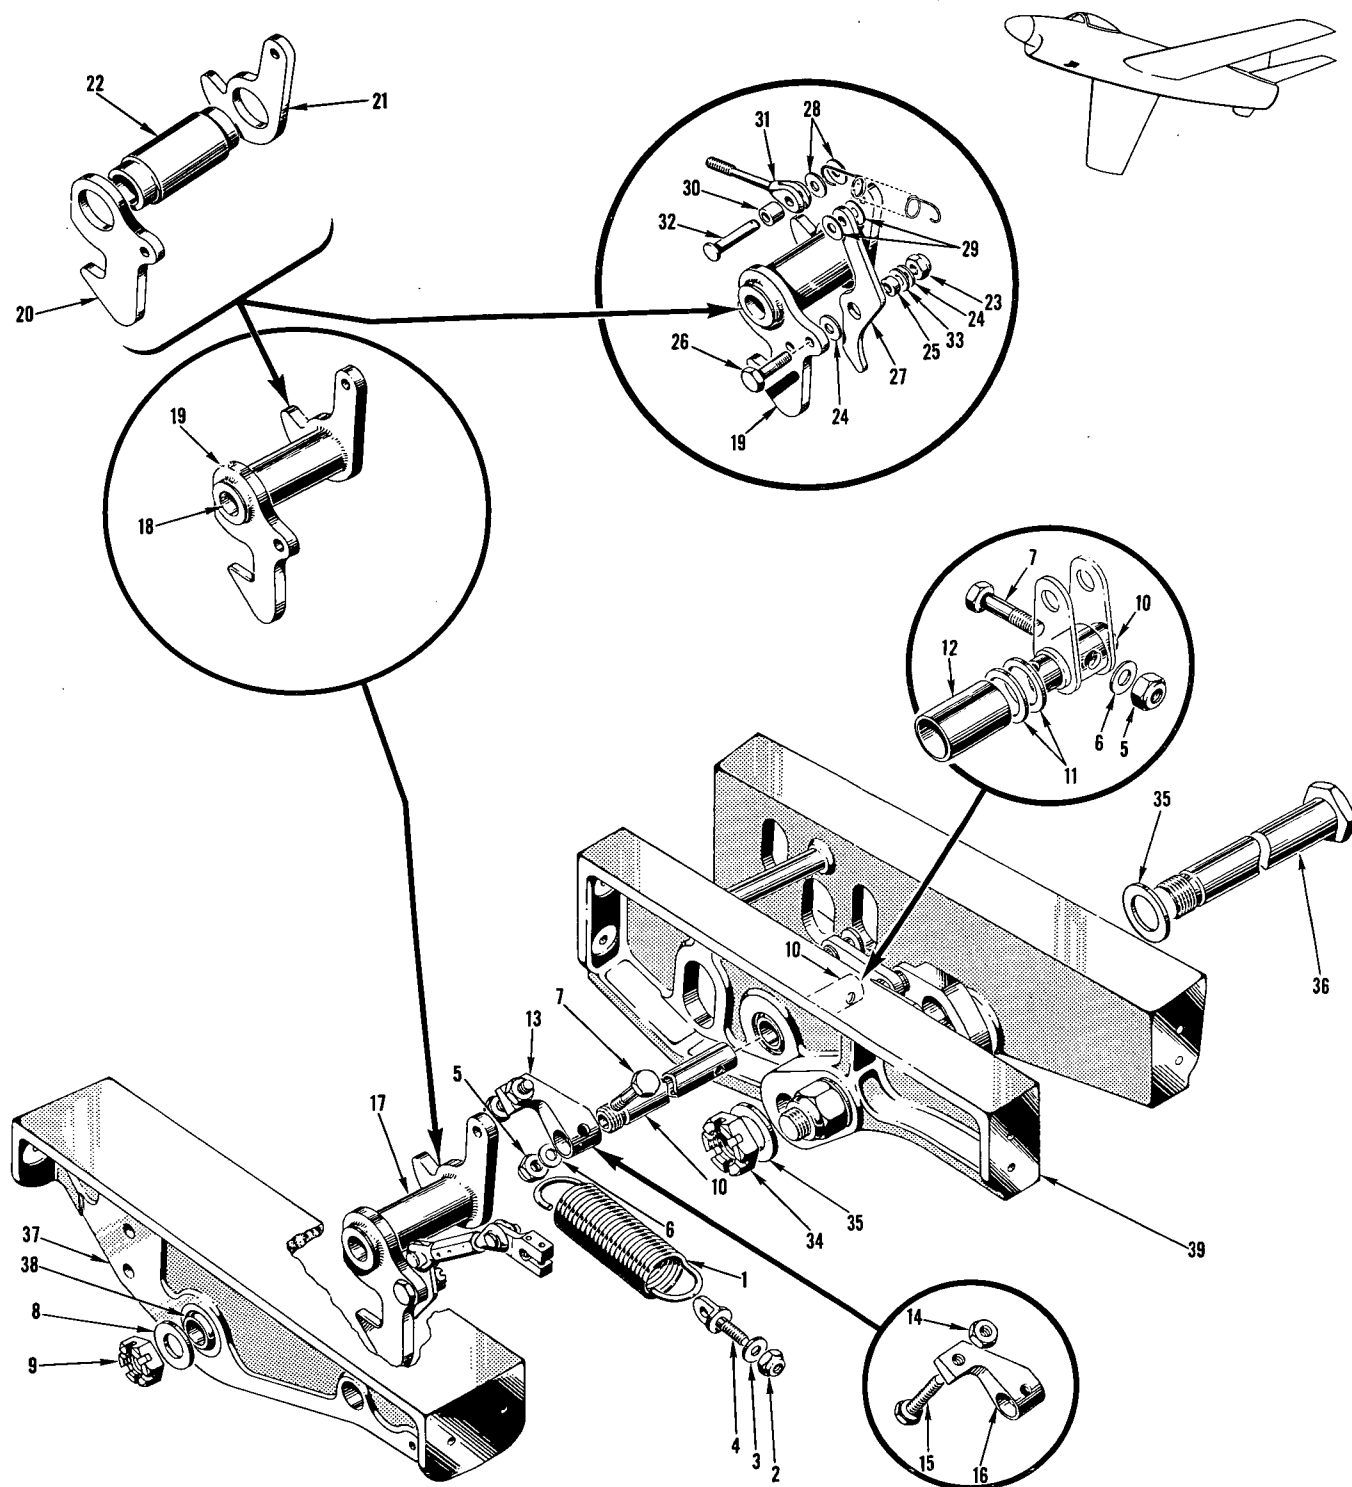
AUXILIARY ALIGNING GEAR INSTALLATION
